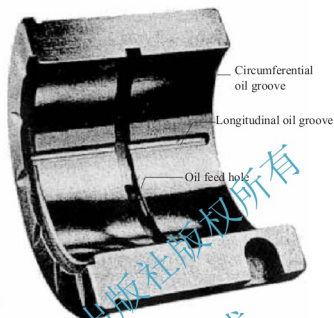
Bearing half showing oil grooves (Courtesy of Federal - Mogul Corp.)
